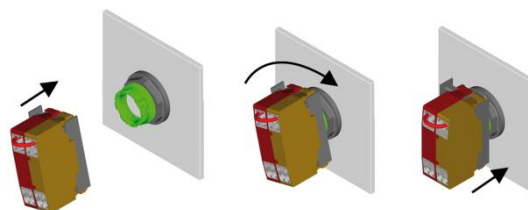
Correct assembly of the modular contact block MTZU, MTZU_564
